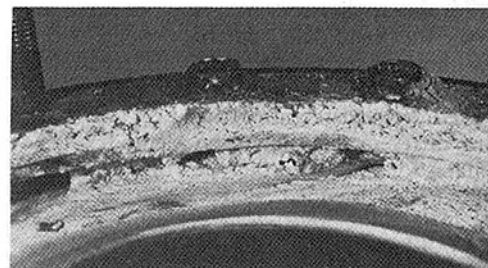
Corrosion test nozzle showing areas of heavy salt product build-up
